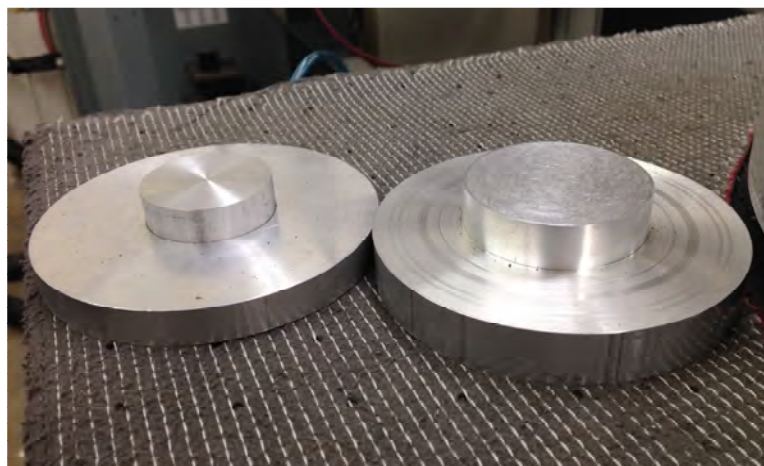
Photograph of AMPT Testing Platens With Removable Spacer Blocks for 38- and 50-mm-Diameter Small-Scale Specimens
